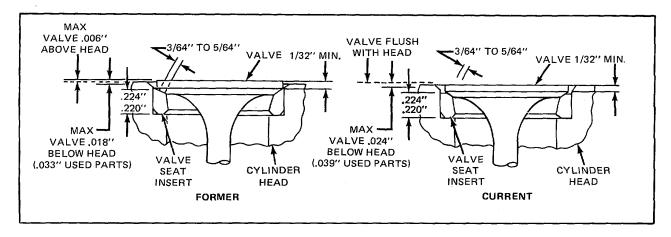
Relationship Between Exhaust Valve, Insert, and Cylinder Head (Four-Valve Head)
